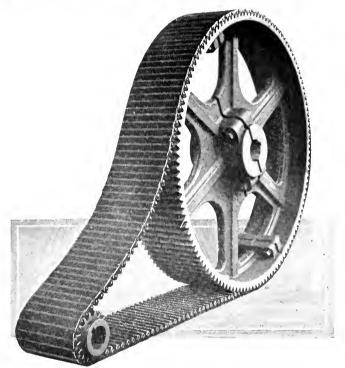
GENERAL CONSTRUCTION OF CHAIN DRIVE
